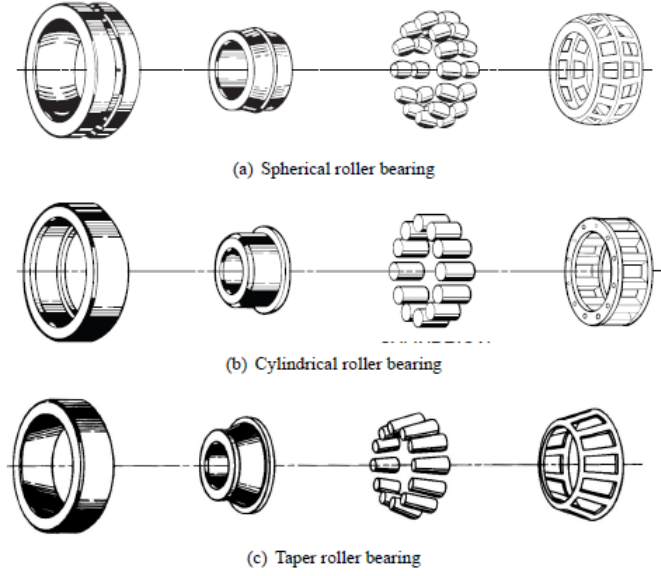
Types of roller bearings used in wind turbines drivetrain. The major parts are displayed (from left to right): outer ring, inner ring, roller component and roller cage (reproduced and modified from [3]).
